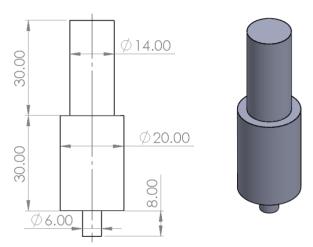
A schematic illustration of the FSP tool (Dimensions are in mm).
